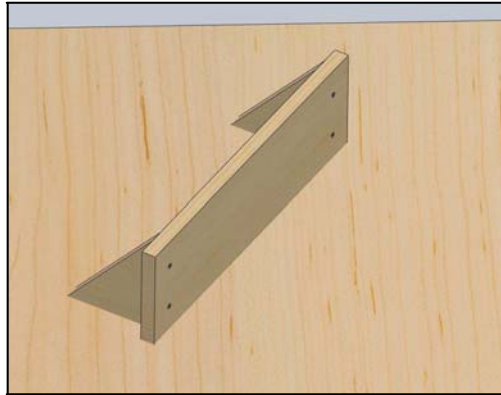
Hold gusset tight against back piece while it is being screwed together.
